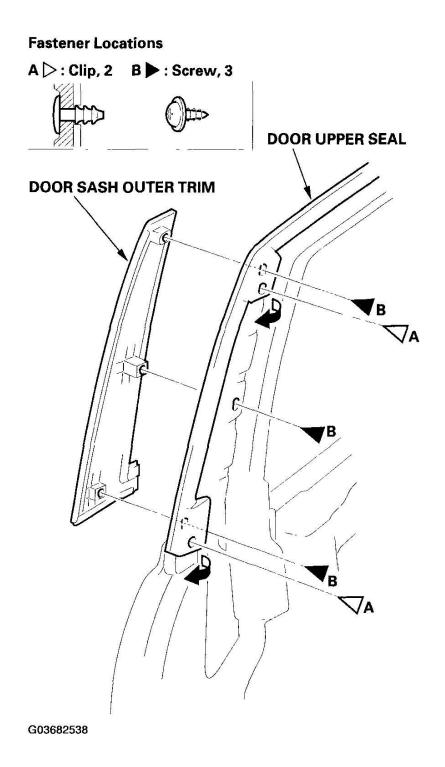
Removing Door Sash Outer Trim Courtesy of AMERICAN HONDA MOTOR CO., INC.
